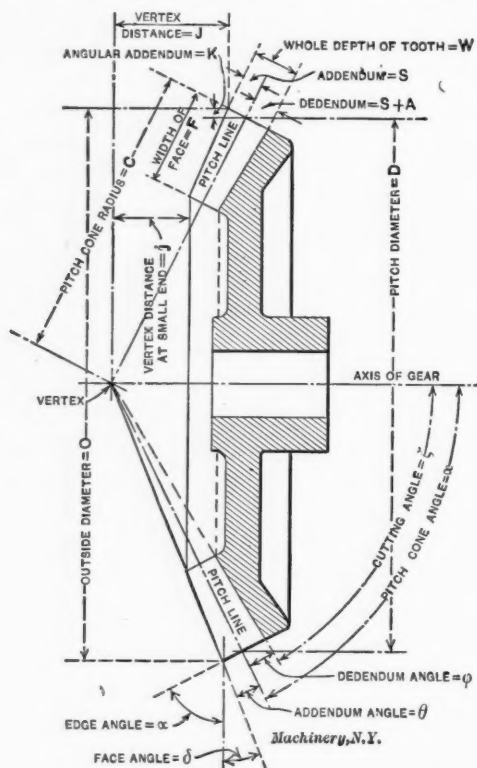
Dimensions, Definitions and Reference Letters for Ordinary Bevel Gear
